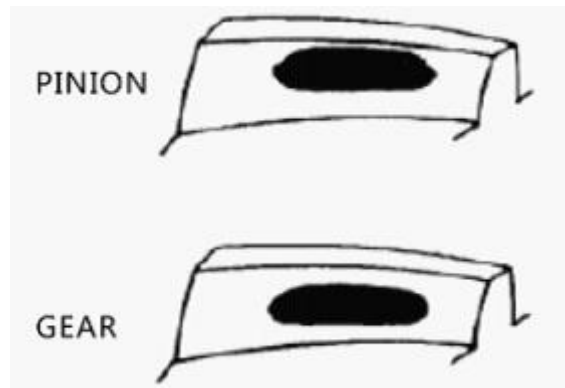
Ideal contact position of the gear and pinion of the crusher
